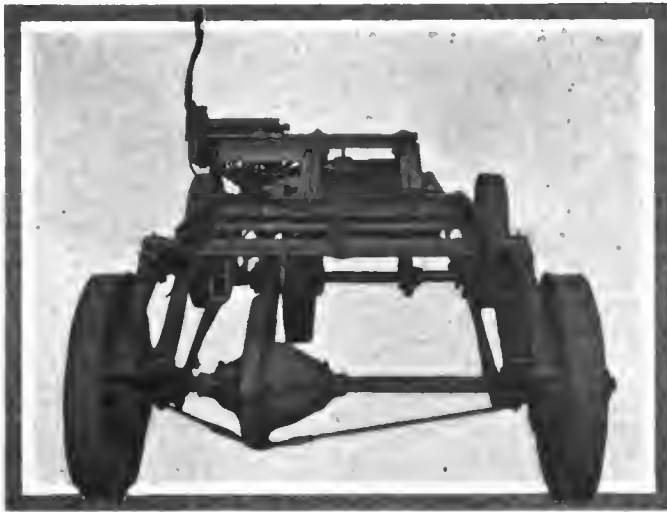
Rear view of Model 17, showing sprocket chain to live rear axle, boot enclosing Morse "rocker" chain, and full elliptic rear springs
